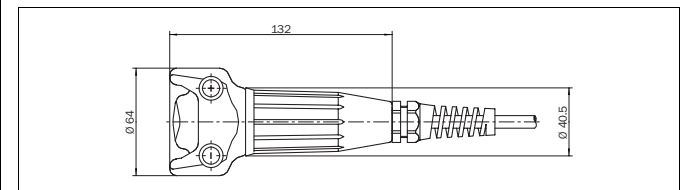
Dimensional drawing E100-B (enabling switch with additional +/- buttons)
